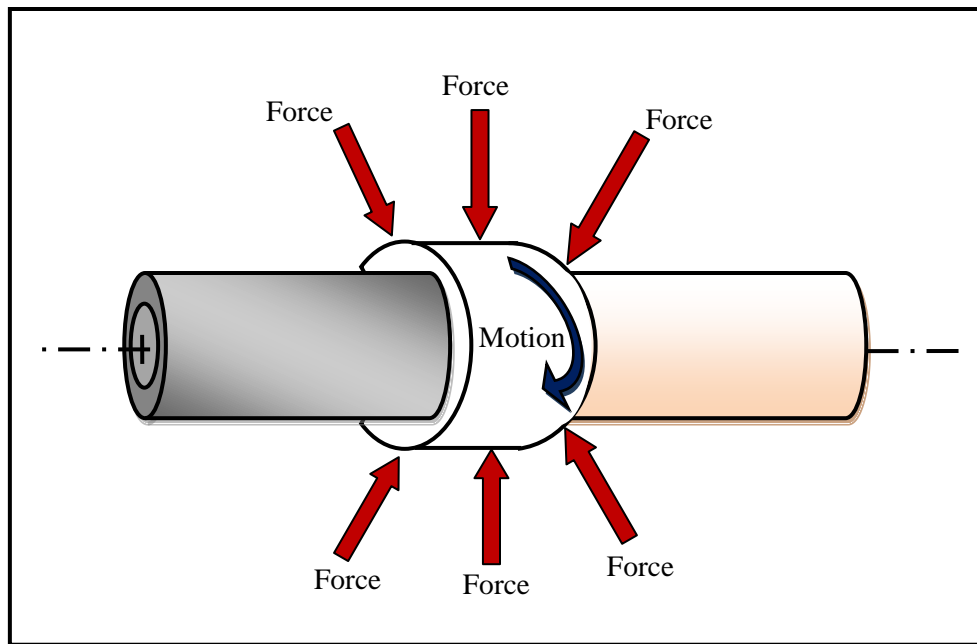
Schematic diagram of the radial friction welding process (Luo et al., 2012)
